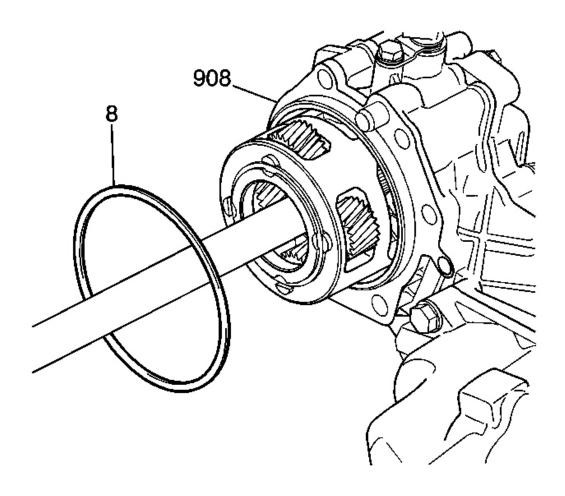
Locating Case Extension Seal Courtesy of GENERAL MOTORS CORP.
